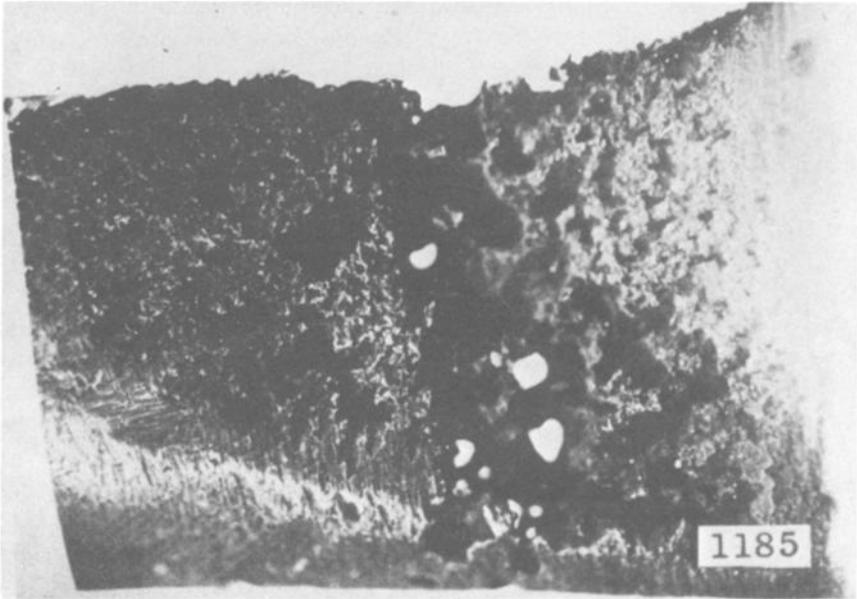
Leading edge of a series 400 stainless steel impeller for a boiler feed pump, exhibiting deep local damage caused by cavitation erosion.
